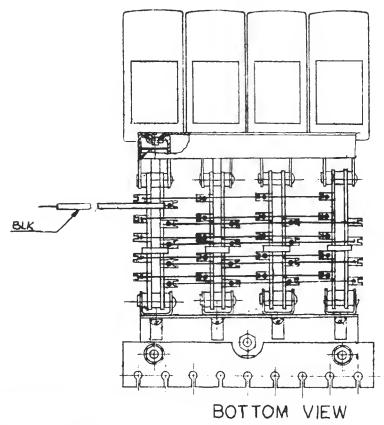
Upper Preset Switch Assembly, Wiring Diagram
